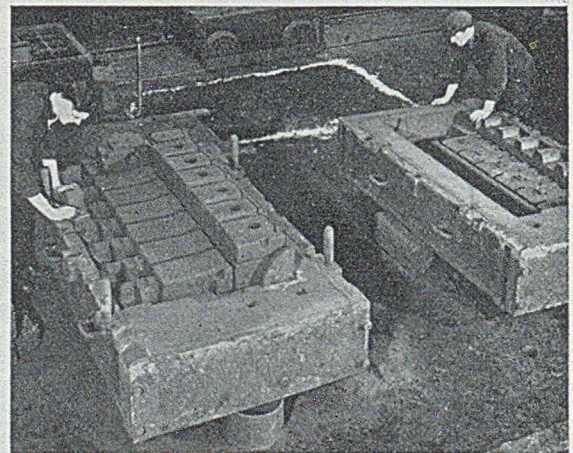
Other Views of Top- and Bottom-half Moulds for the 7-crank Oil-engine Casting being "Finished" prior to Assembly and Casting.
